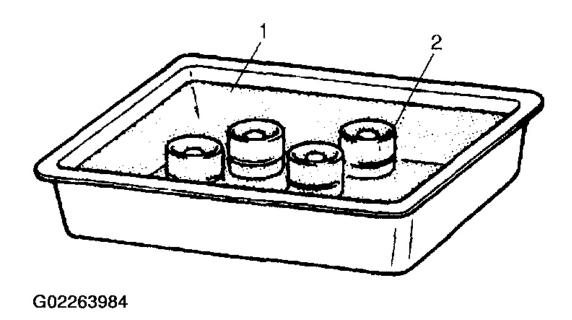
Immersing Hydraulic Valve Lash Adjusters In Clean Engine Oil Courtesy of SUZUKI OF AMERICA CORP.
